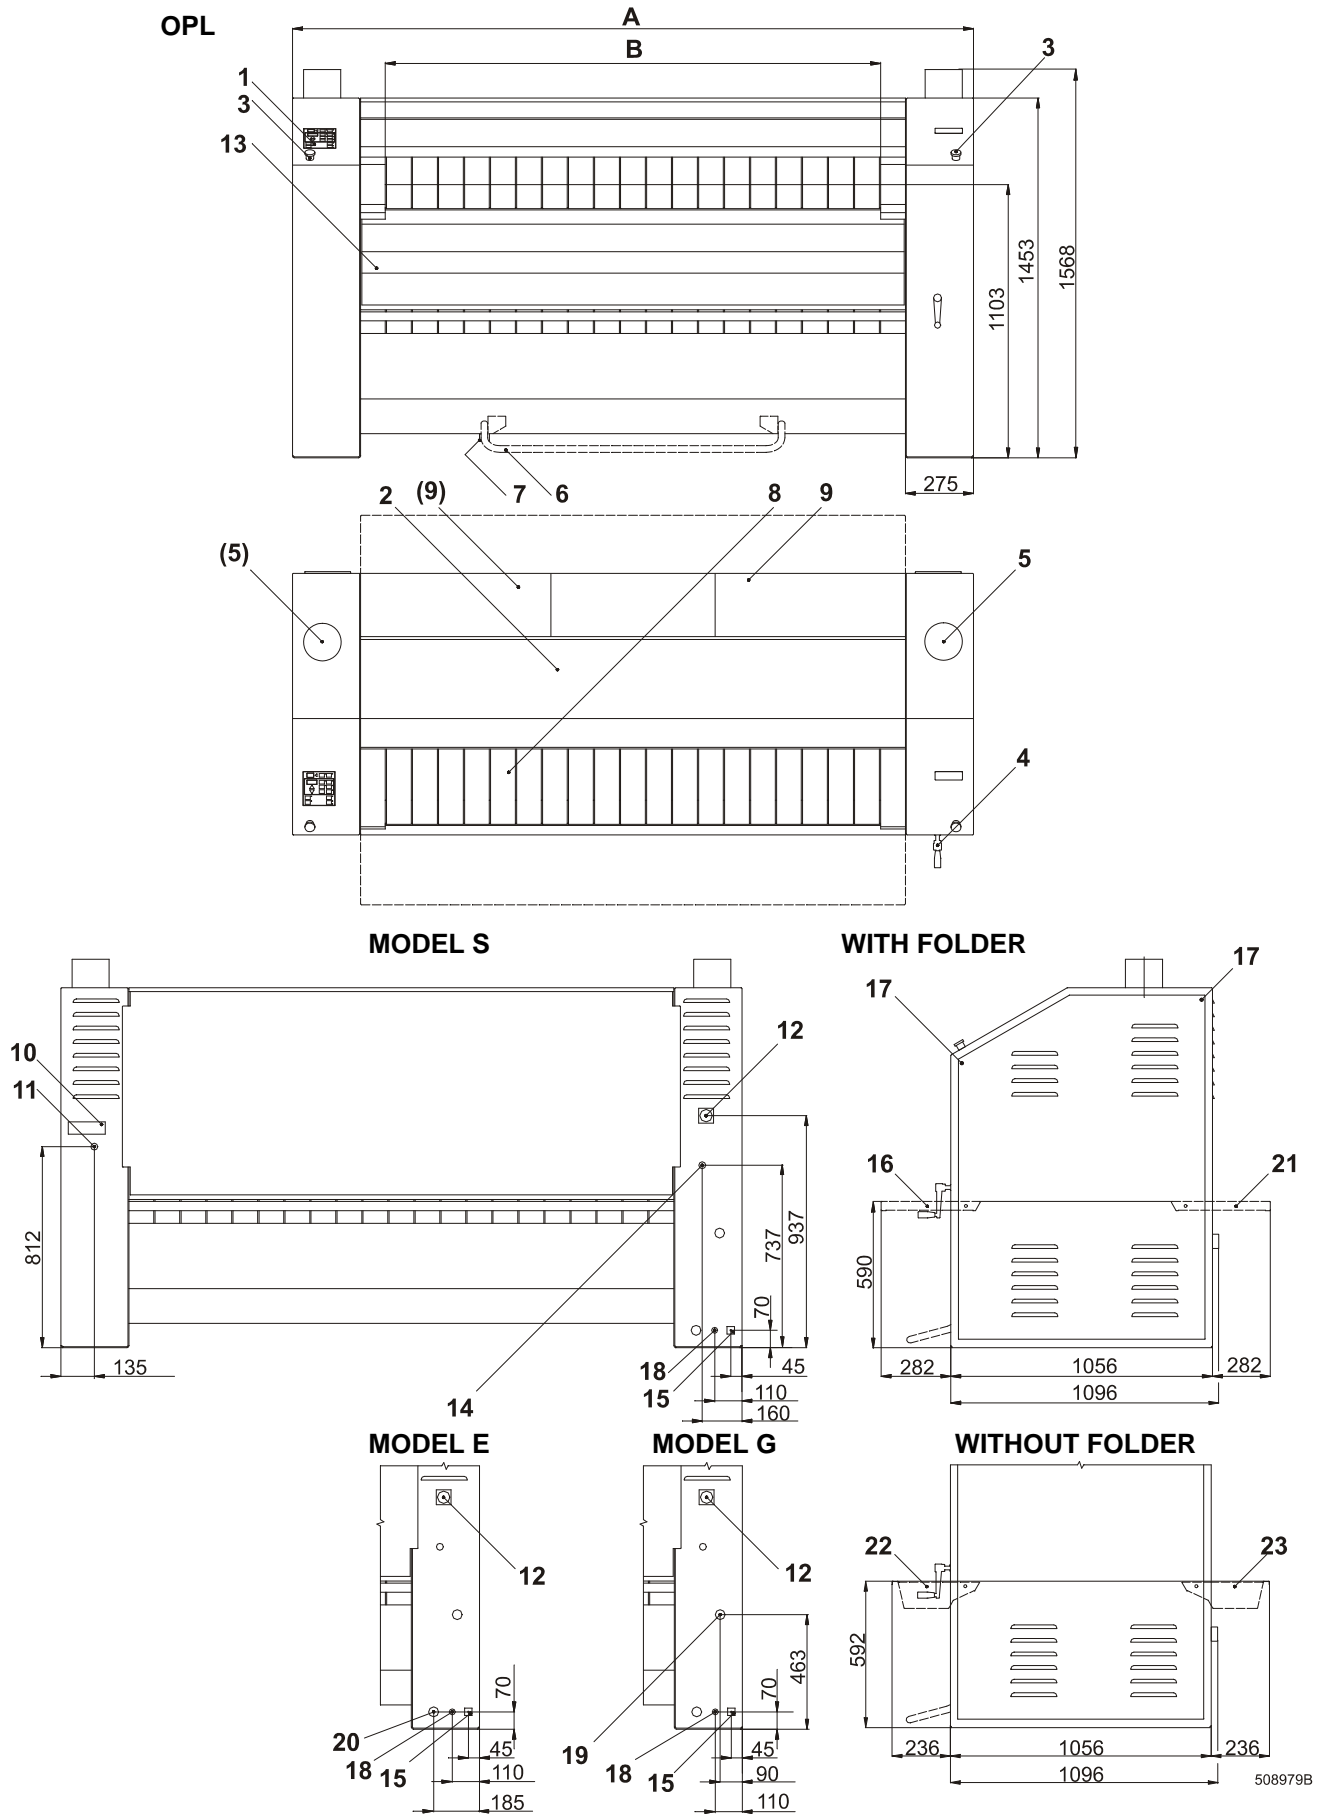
A Layout of components on the ironing machine with front/rear delivery.
